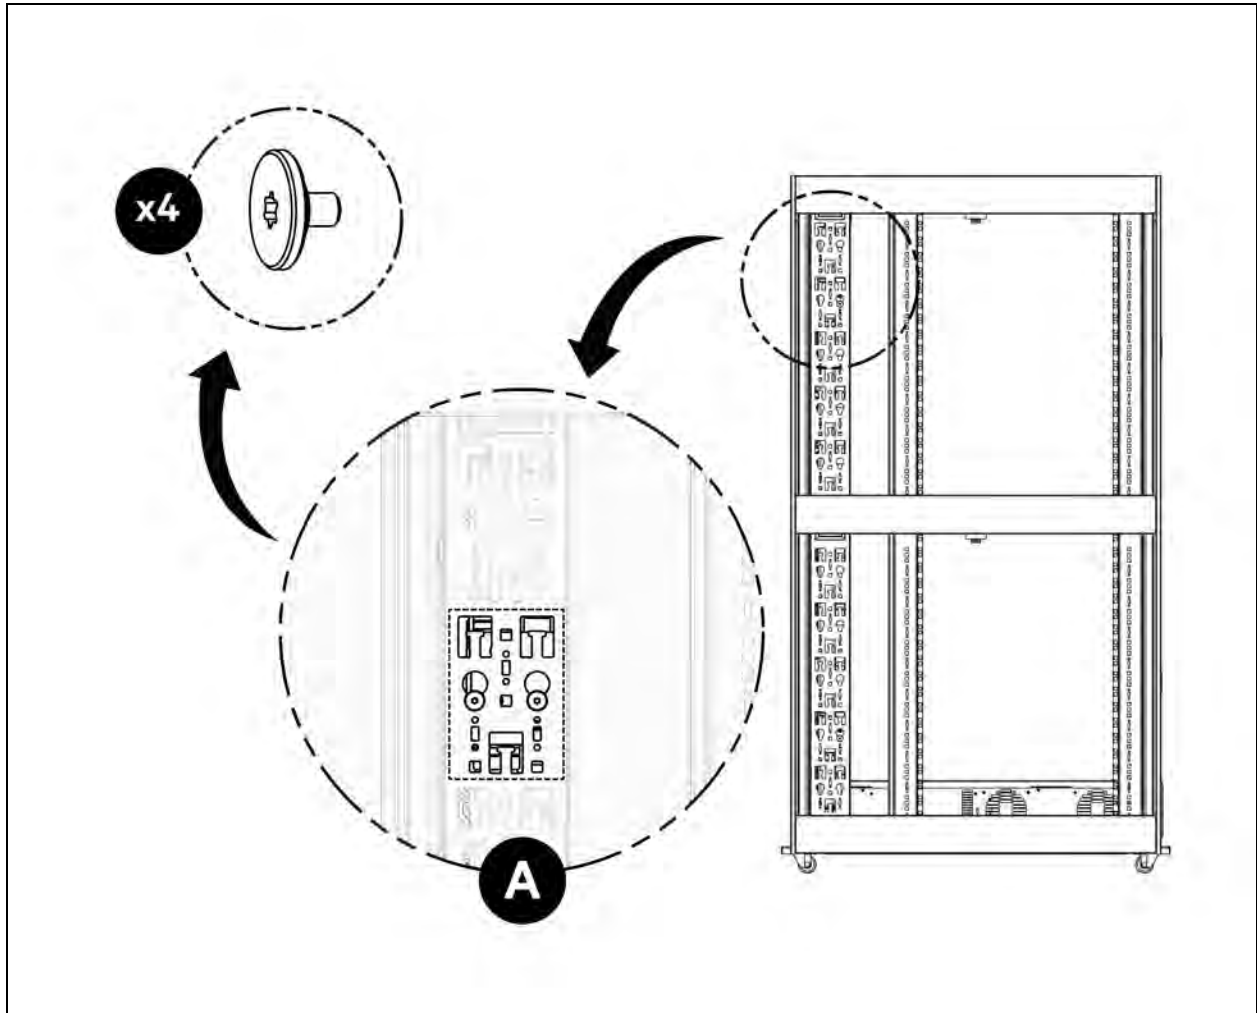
Fix the Hanger Button in the In-Rack Manifold Bracket
